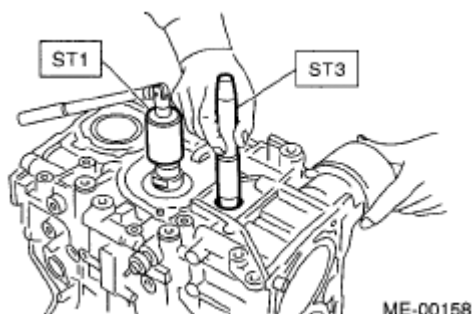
Aligning Piston Pin Hole With Connecting Rod Small End
